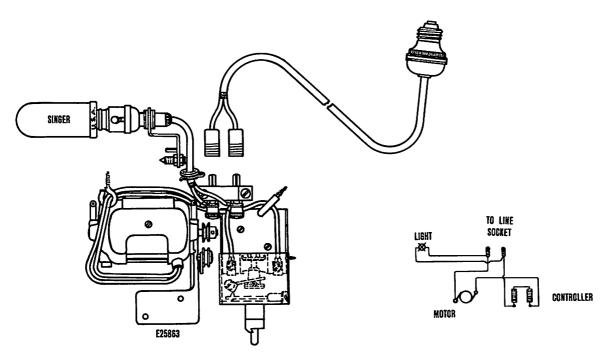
Wiring Diagram for BU107 Motor on 24-65 Machine in Portable Set No. 130205
